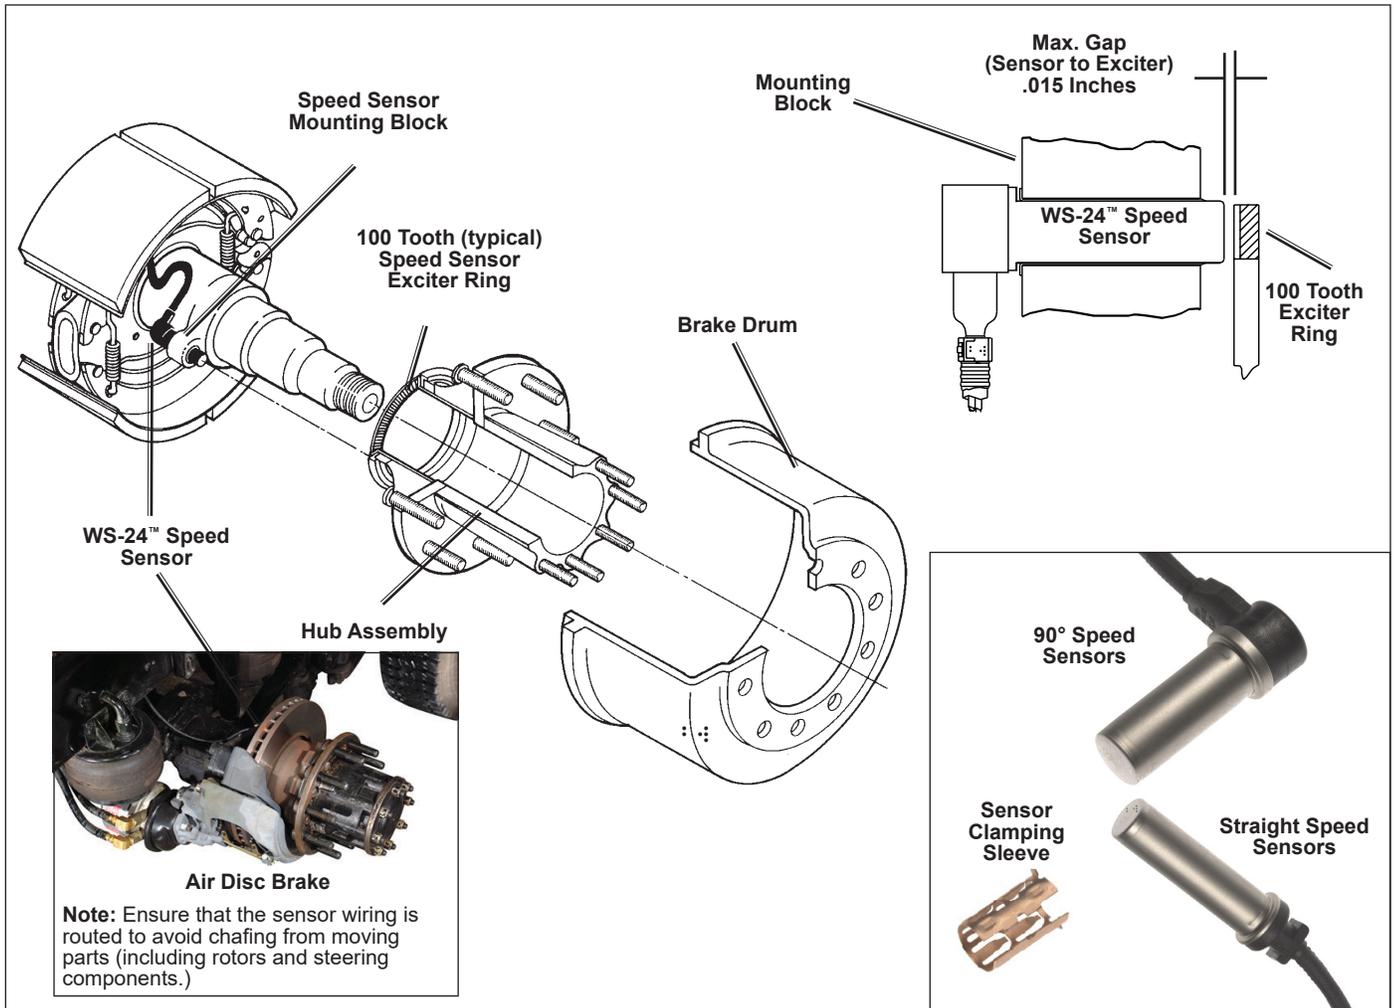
BENDIX® WS-24™ WHEEL SPEED SENSOR INSTALLATION (S-CAM AND AIR DISC BRAKE)
